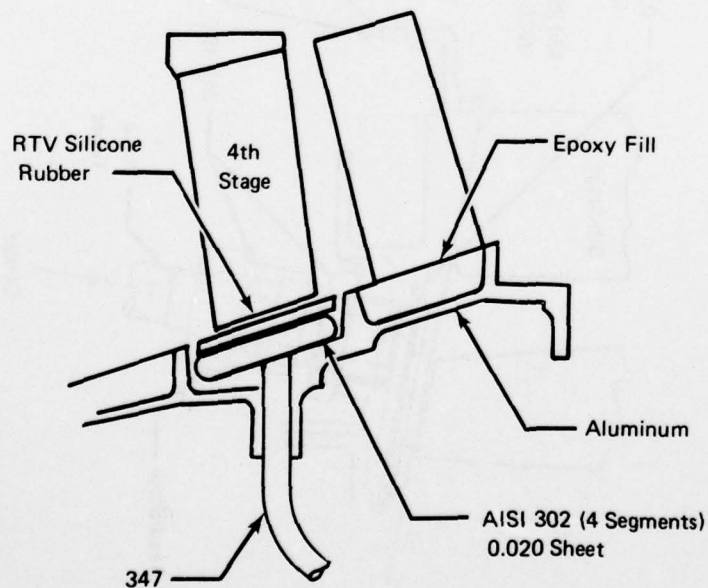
Scheme No. 18, Low Compressor, Stages 2 through 6, Sketch No. 26
